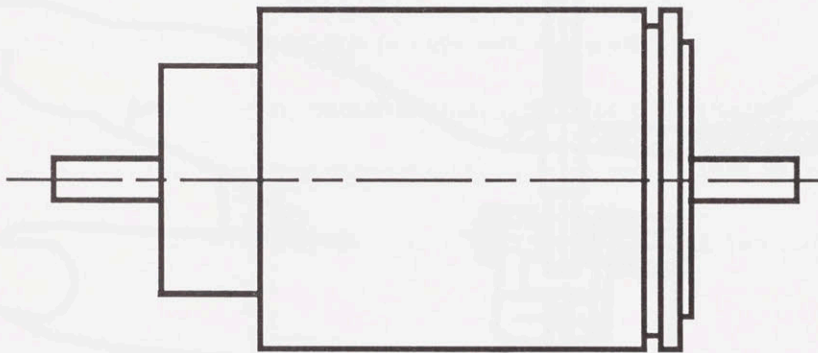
True Size View of Pronation/Supination DC Motor
